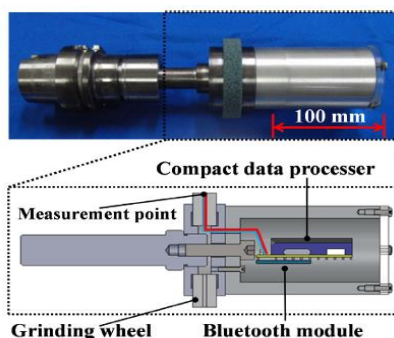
Monitoring wheel for machining state<sup>(46)</sup>
